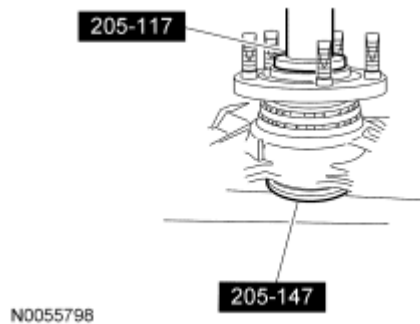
Pressing Wheel Hub Into Wheel Bearing Using Special Tools (205-147, 205-117)
